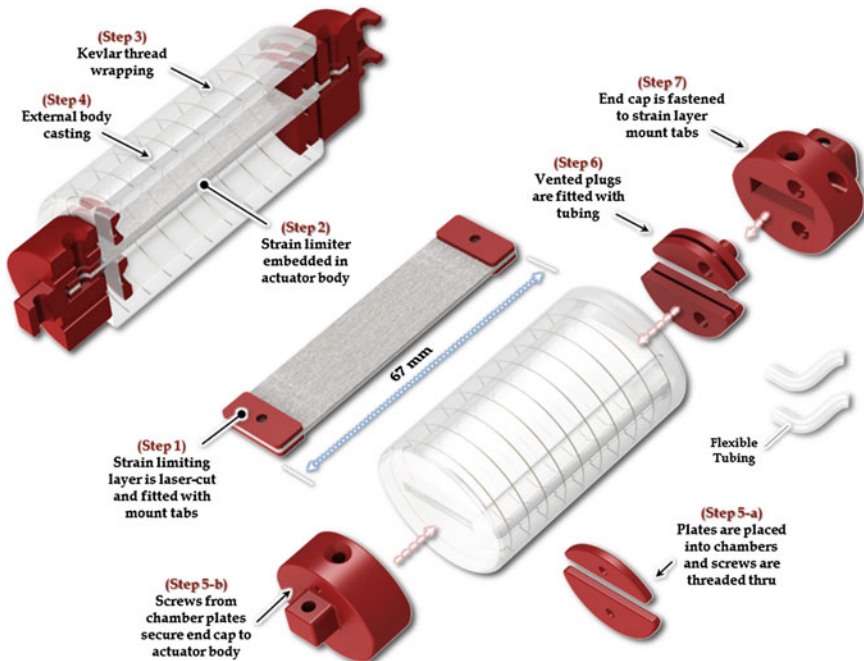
Sectioned view (*top left*) and exploded view (*bottom right*) of bidirectional bending actuator components, with 3D printed parts colored *red
